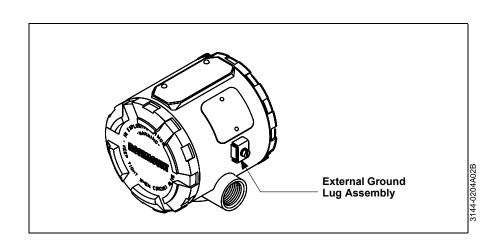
External Ground-Lug Assembly Installed on a Model 3244MV Transmitter.
